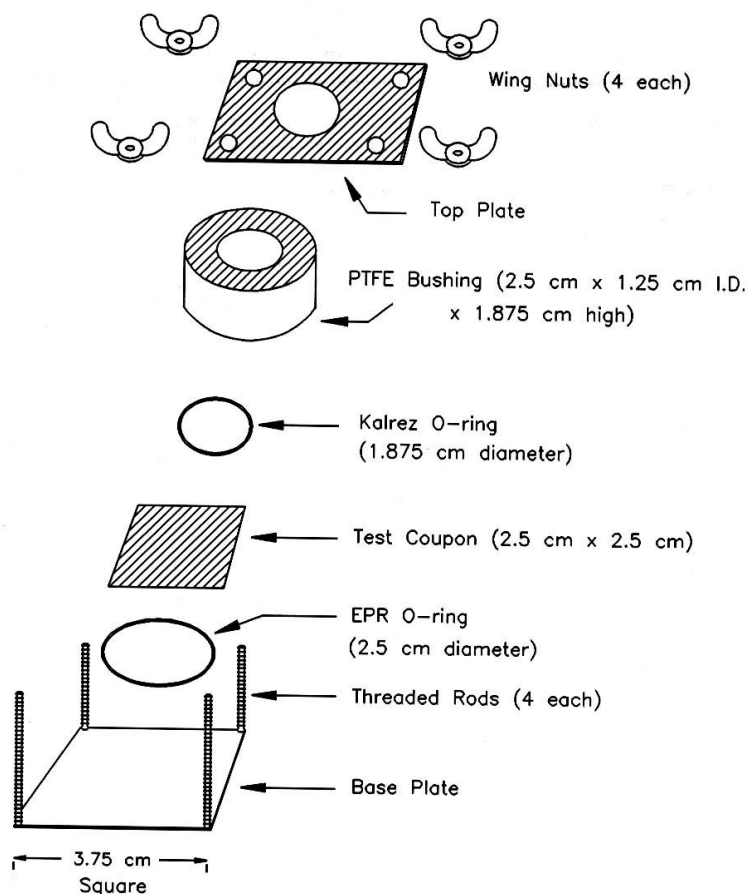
Test fixture for liquid exposure of composite coupons without edge exposure.
